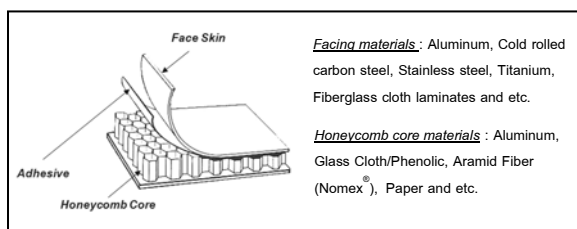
Typical honeycomb panel construction and materials were used [1,2]
